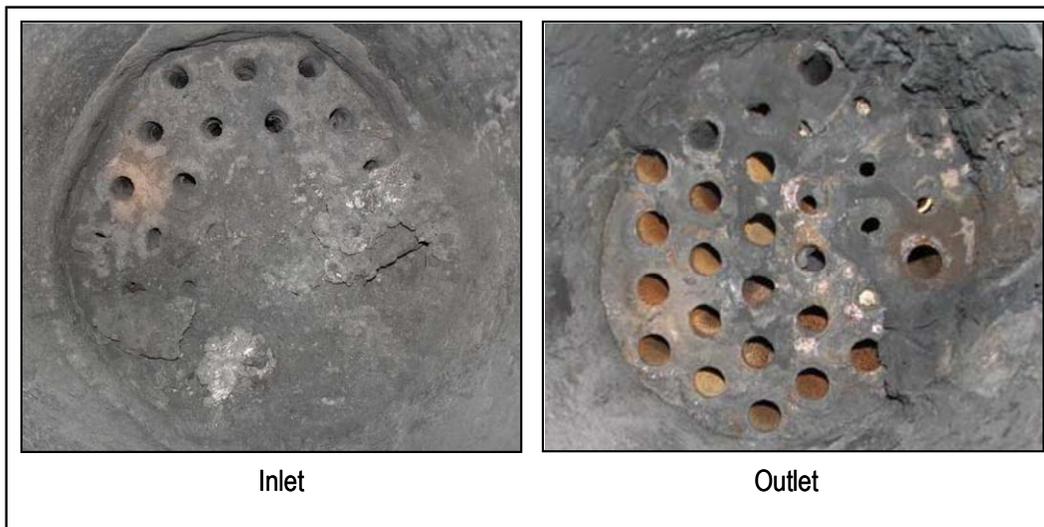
Inspection of Primary Gas Cooler Inlet and Outlet.
